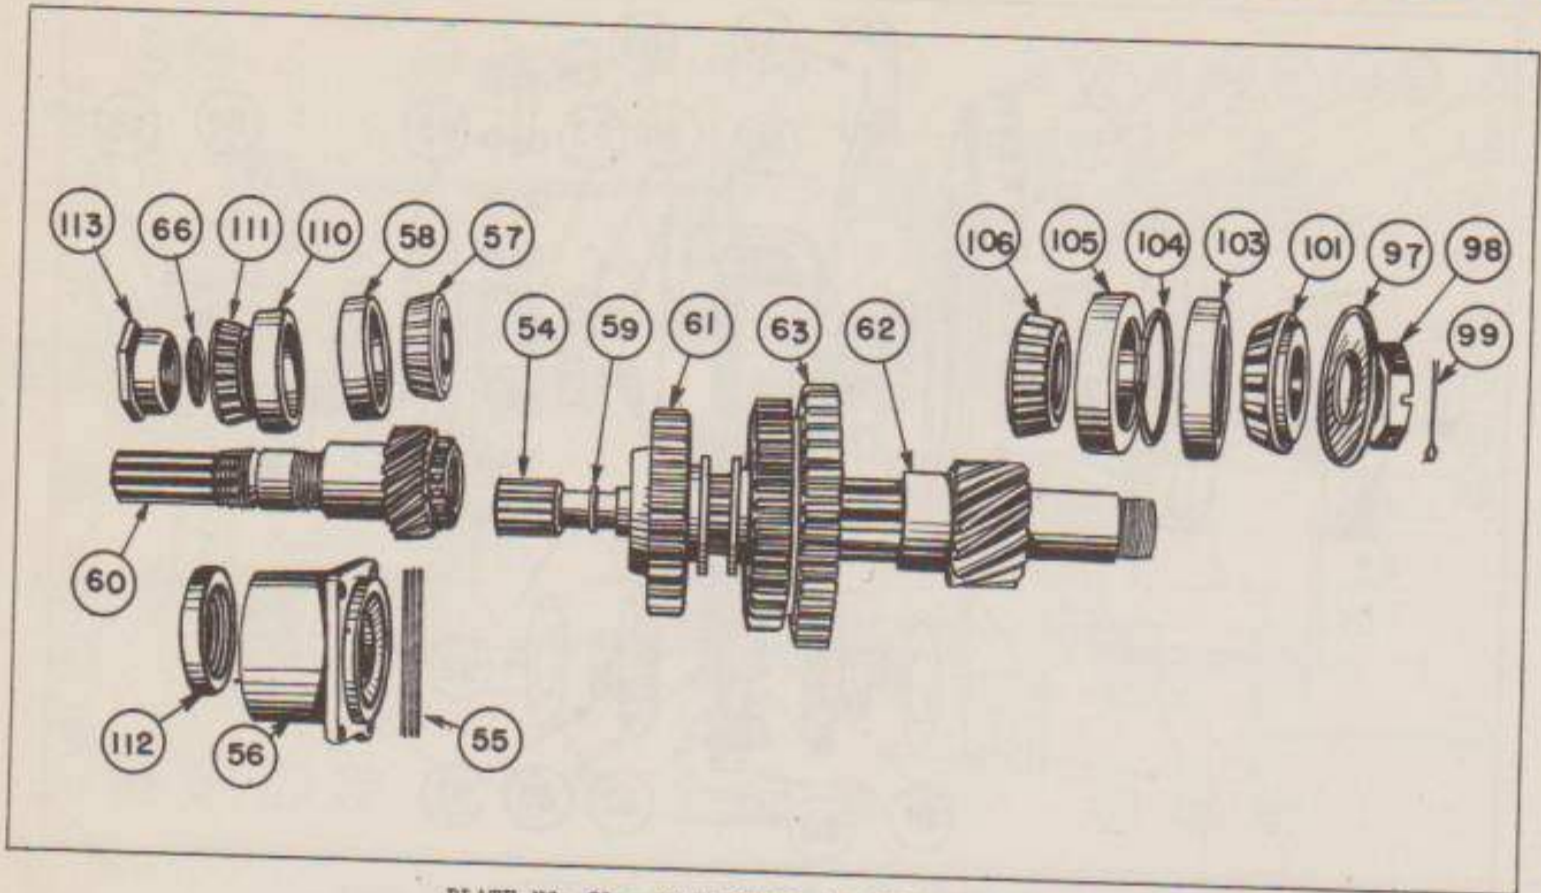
MAIN SHAFT AND GEAR ASSEMBLY
